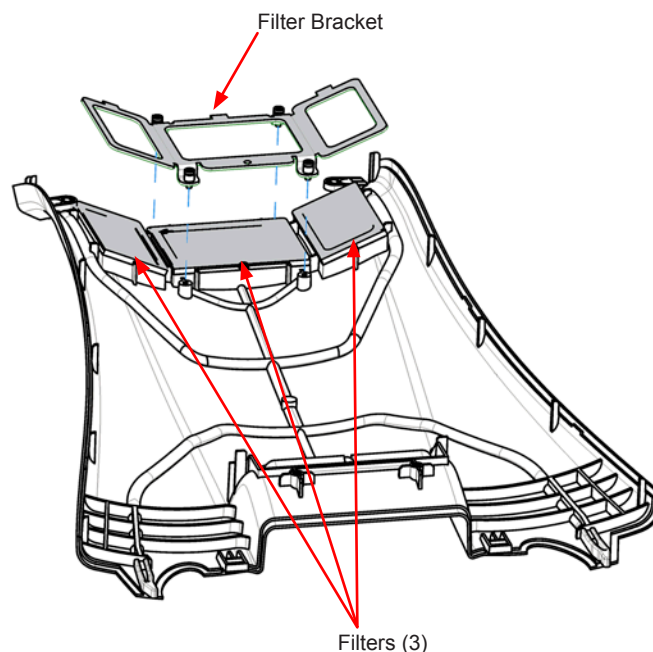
Lower Front Panel - Filter Bracket and Filter Removal
